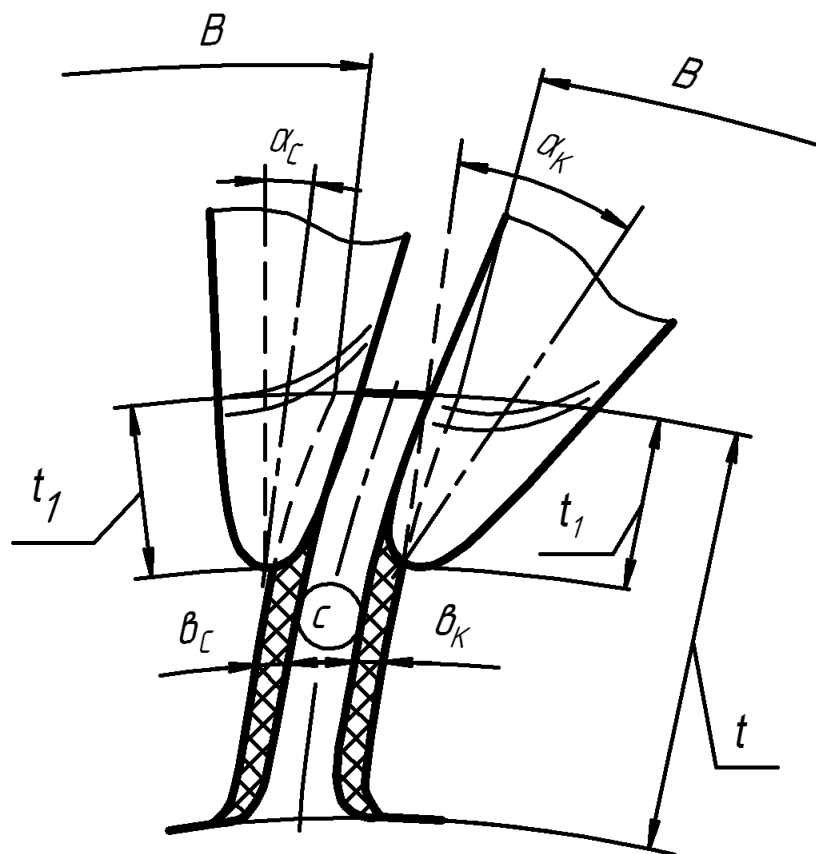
Machining pattern (stock removal) on the first milling pass around the processing blade profile
